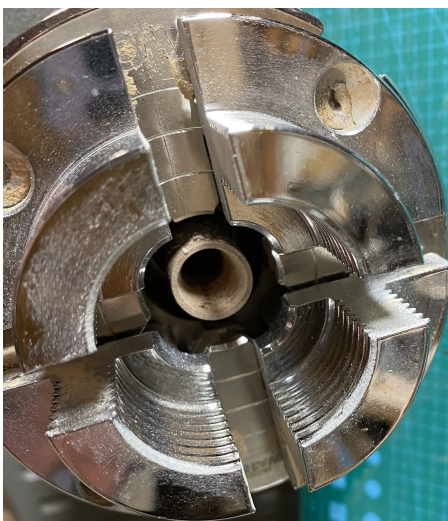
Showing the position of the MT2 tail section holder when mounted in the headstock and with the chuck attached.
